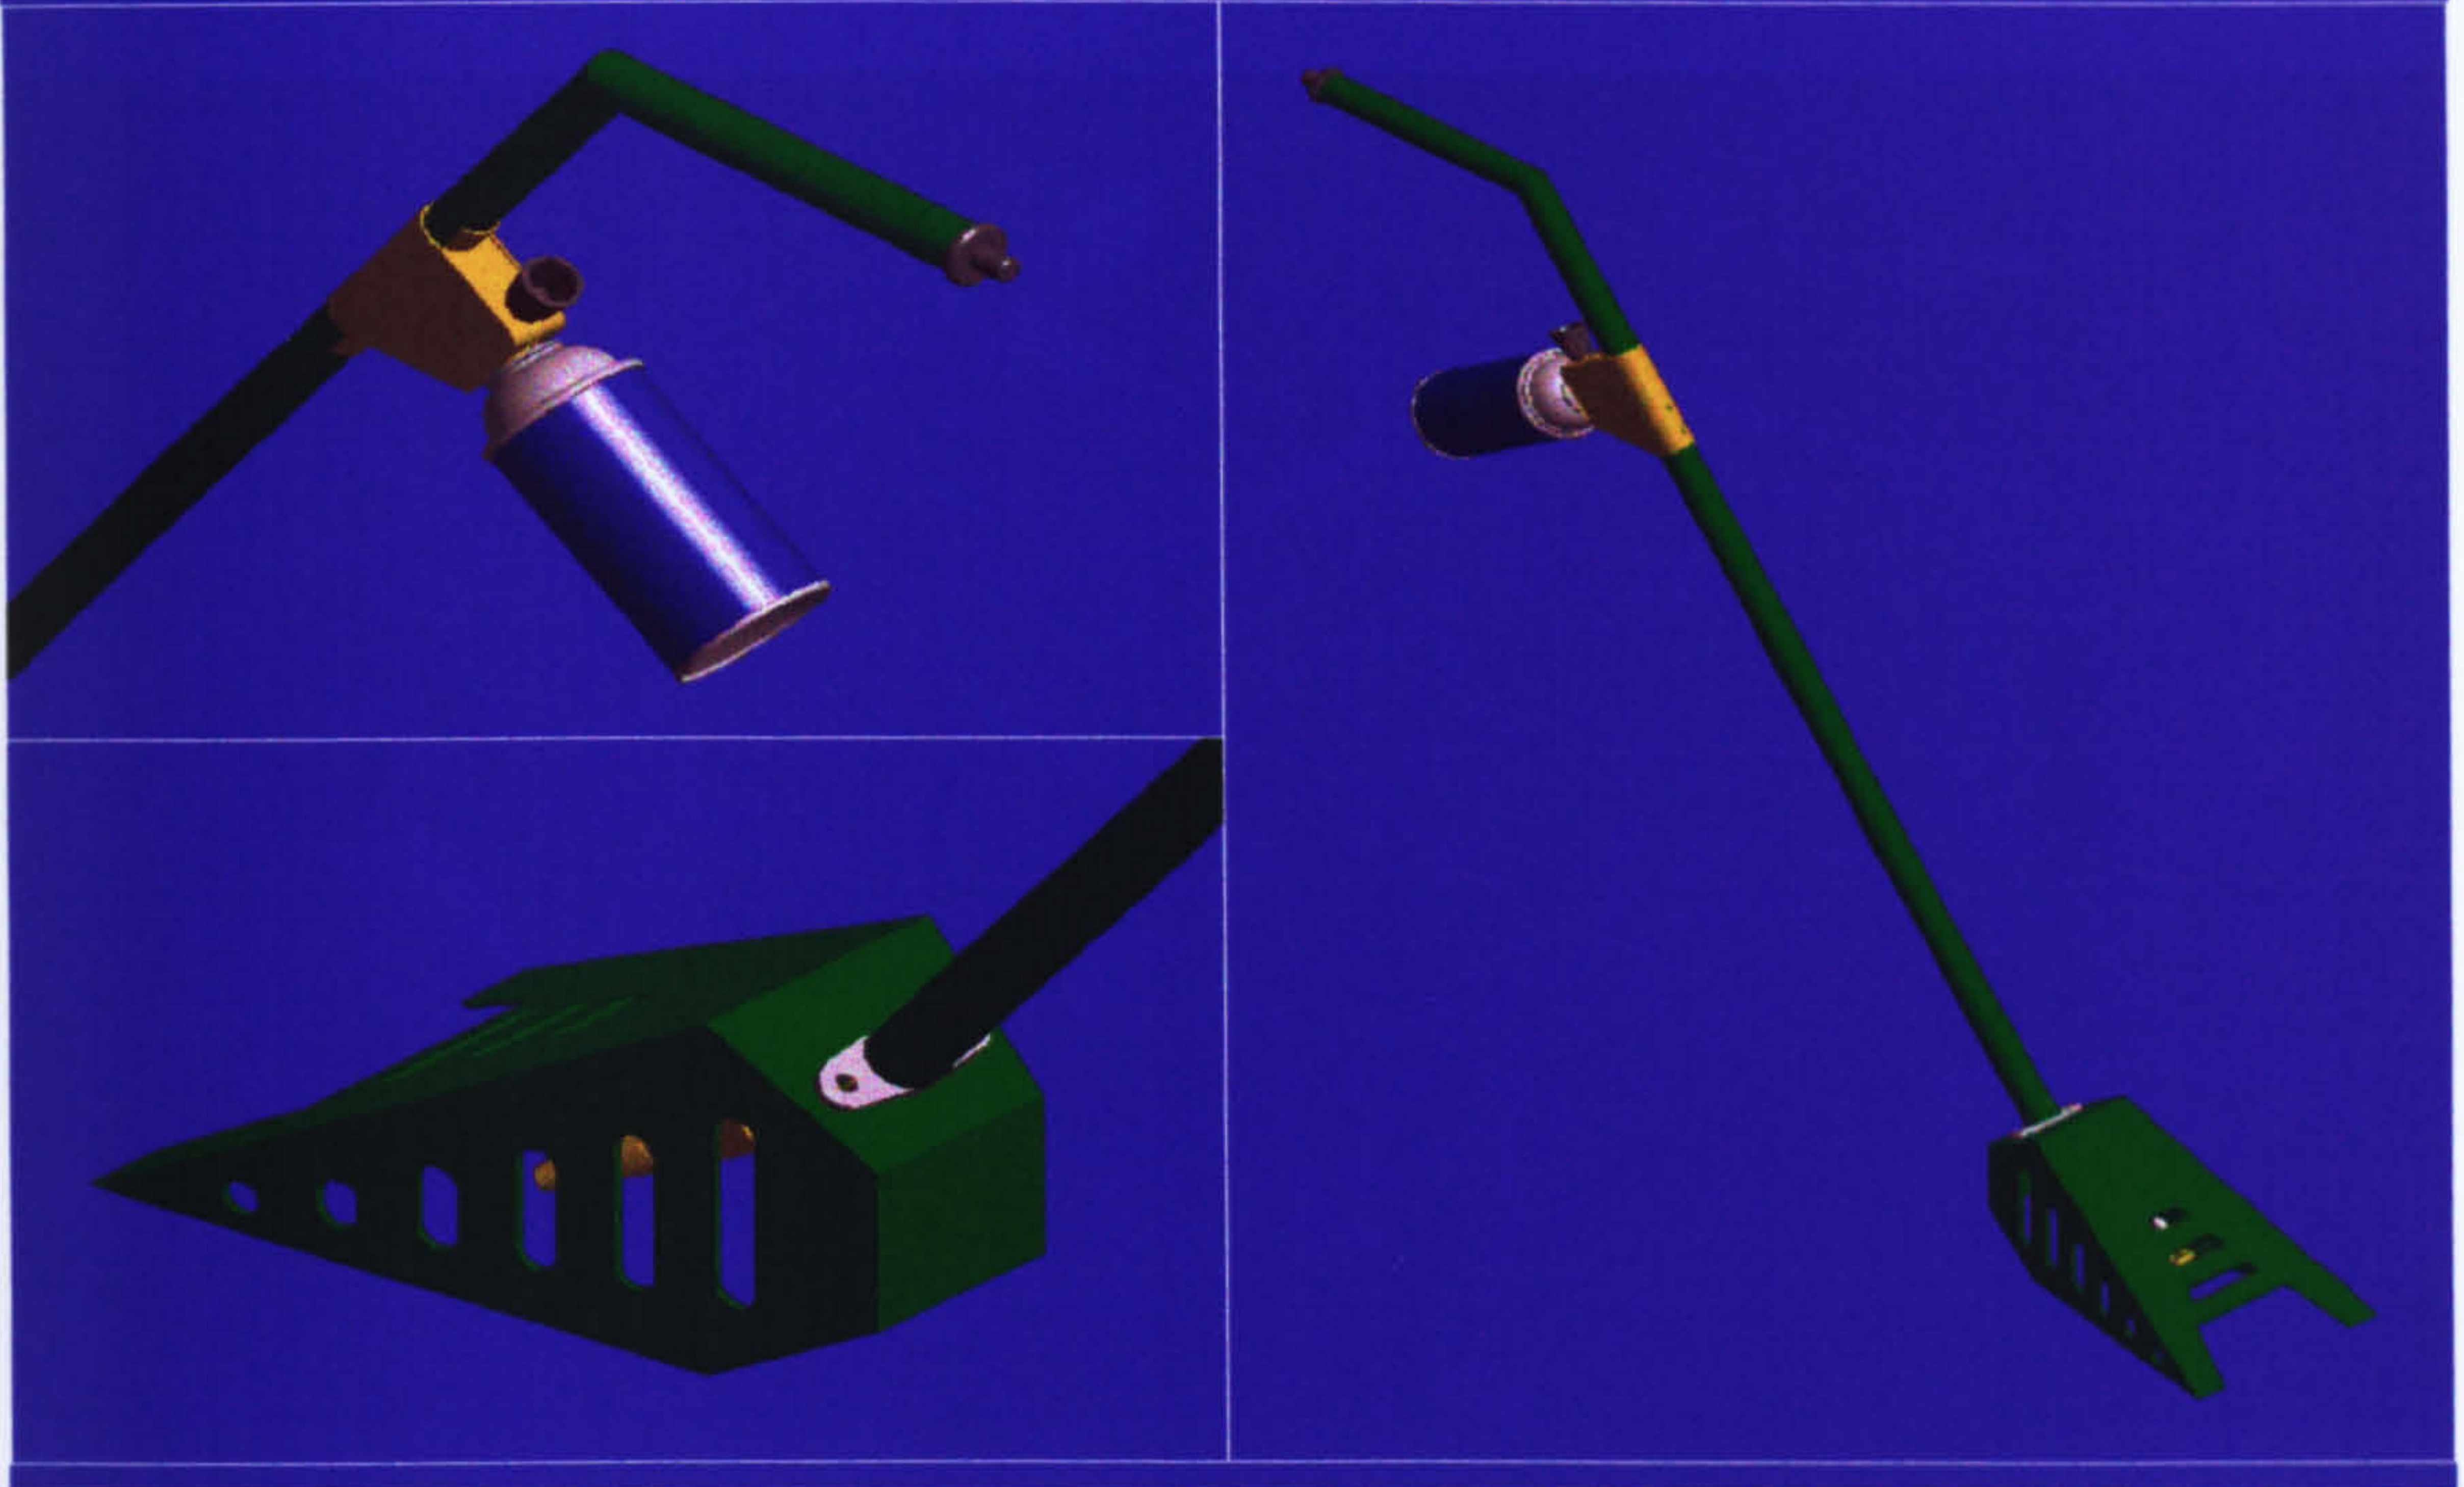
Gas Powered Weed Burner showing assembly and burner unit.
